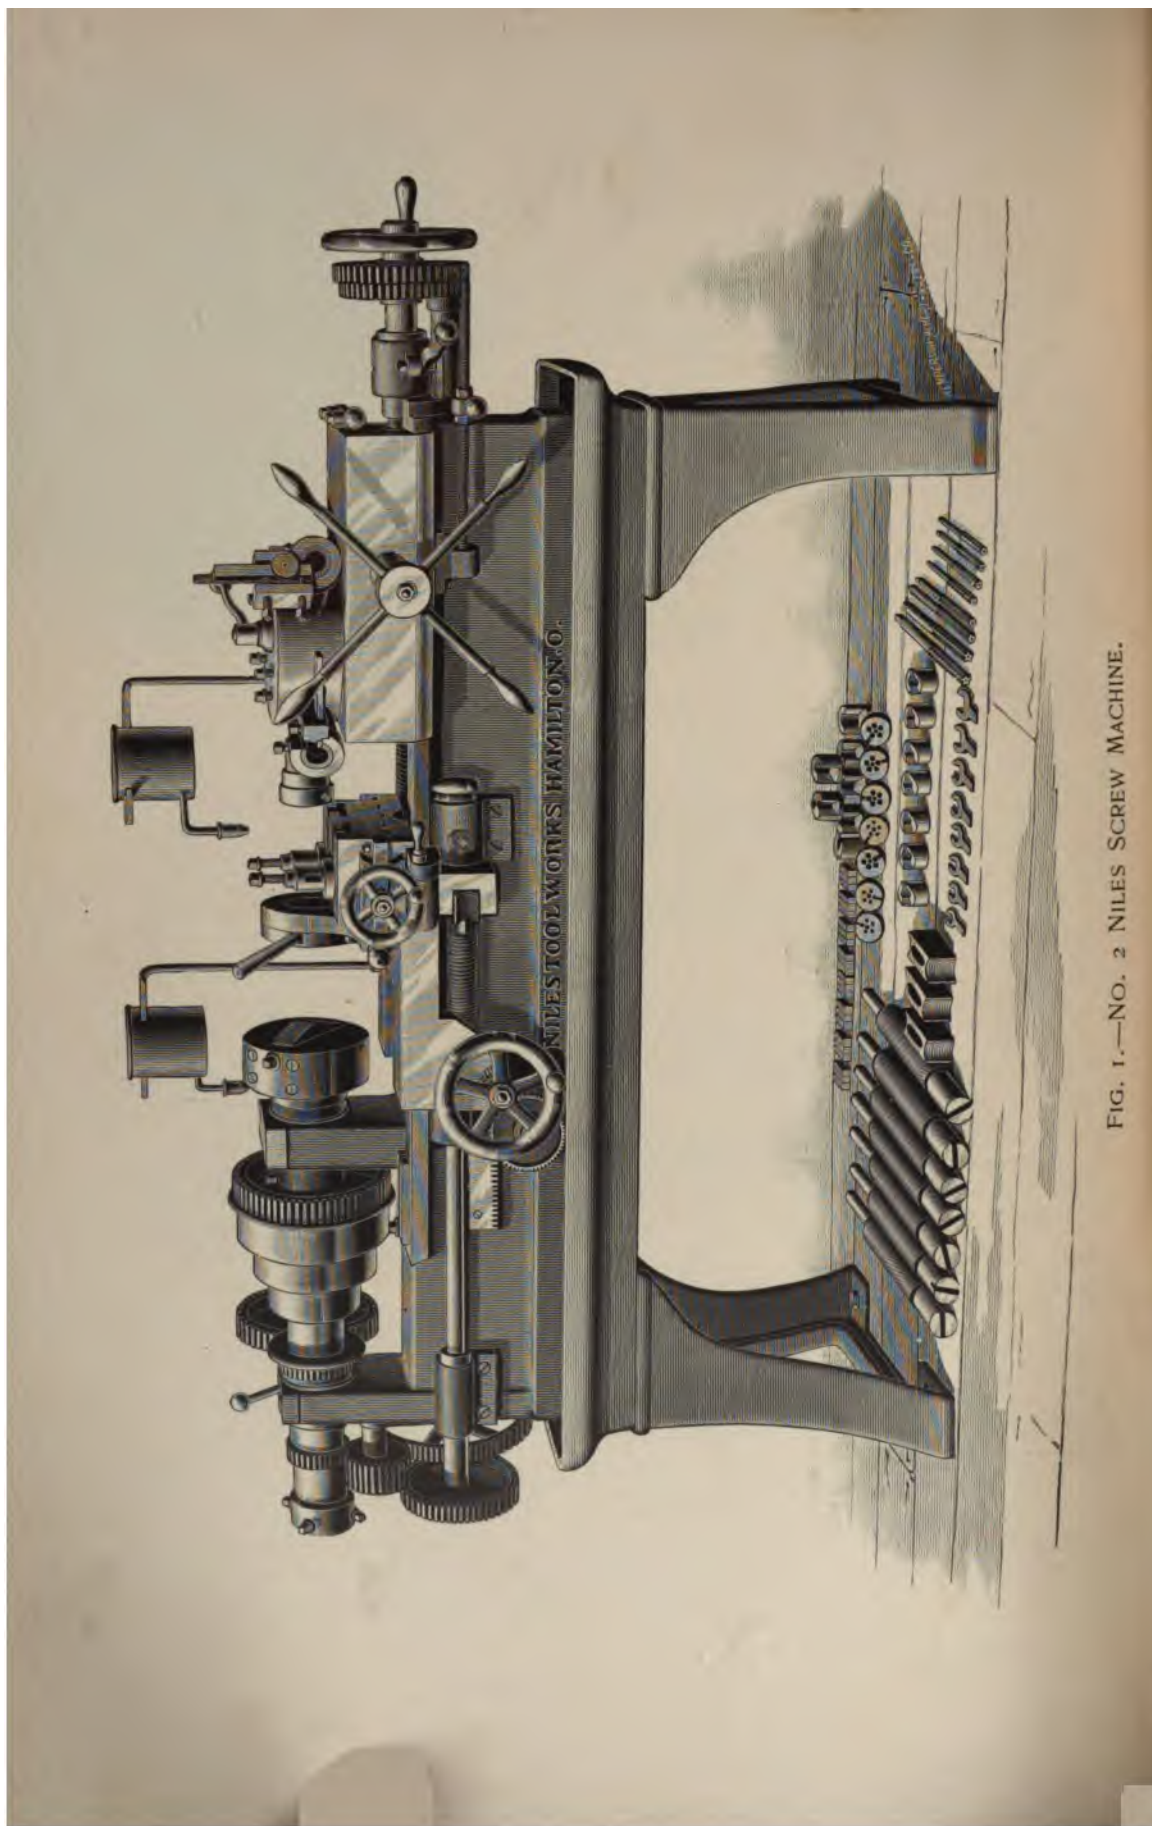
NO. 2 NILES SCREW MACHINE.
